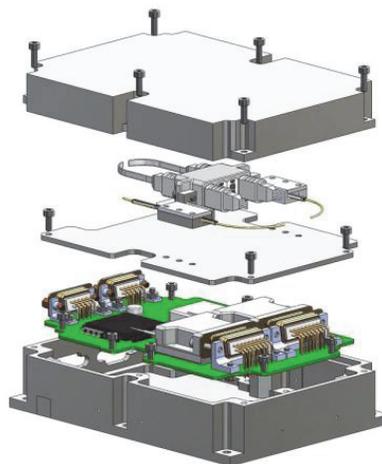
Exploded view of HERMOD box including the optical (upper) and electronic (lower) layers.
